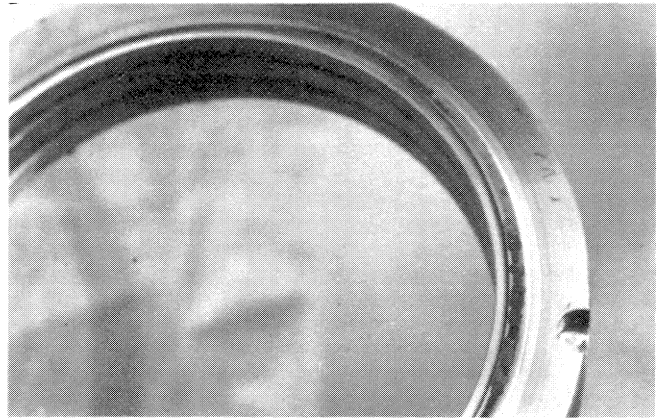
Outer Seal Ring Showing Fretting Damage to Lapped Sealing Face.
